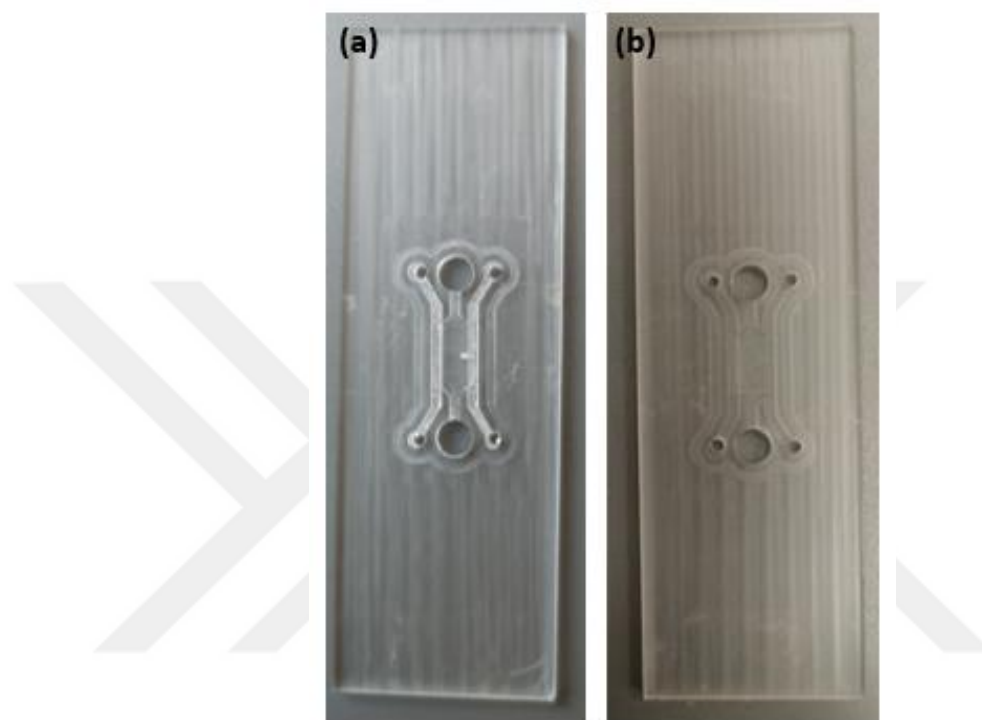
CNC machined PMMA having 150/400 μm channel heights, 1 groove 600 μm diameter, 70 μm retention length, and 50 μm height d a) before cleaning b) after cleaning.
